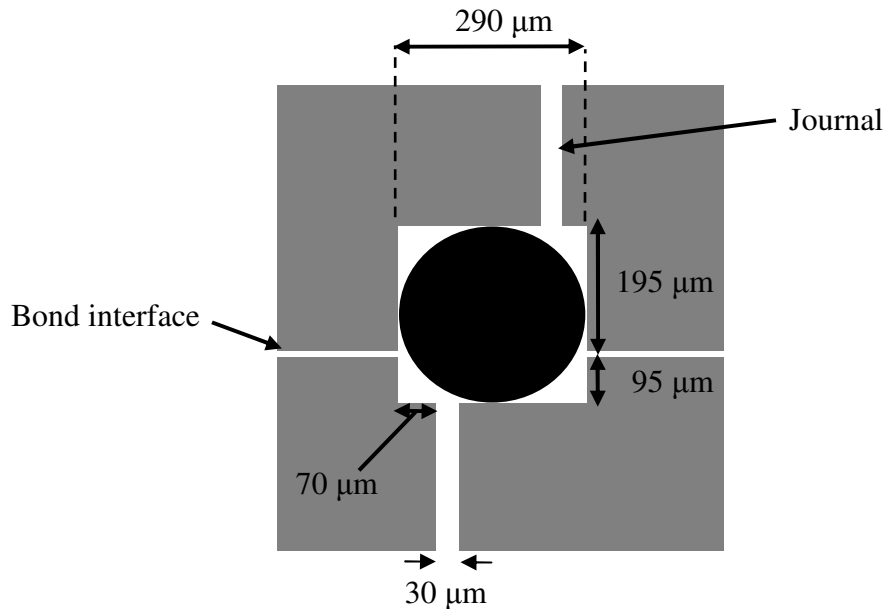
Schematic drawing of the planar-contact bearing V.2 implemented in the spiral-groove turbopump.
